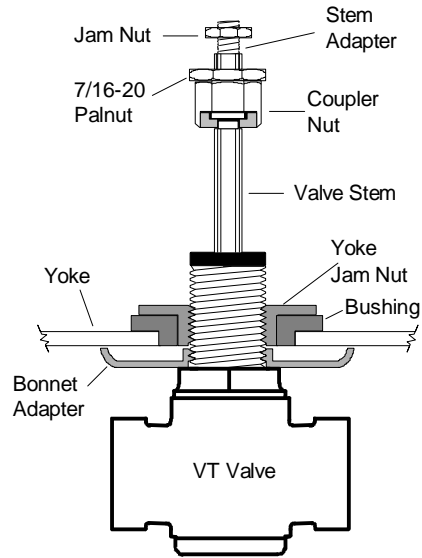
Assembling VT Valve to M100 Series Linkage Kits
